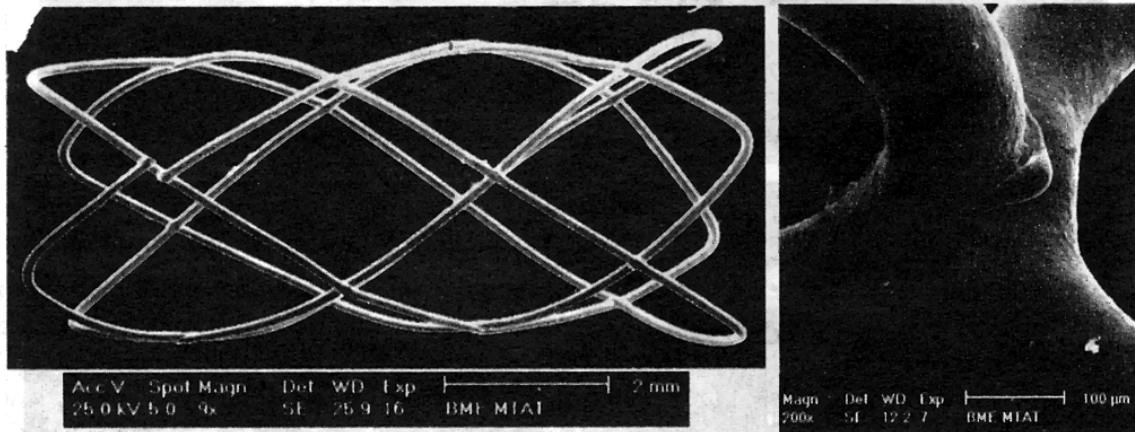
Micro-projection welding of 0.6 mm Nb-wire and 0.9 mm Ni-Mn alloy wire: poor (left), good (right)
